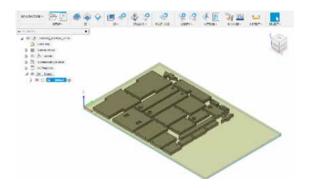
Nested parts of the Compression Moulding Machine inside the defined stock – Manufacturing model
